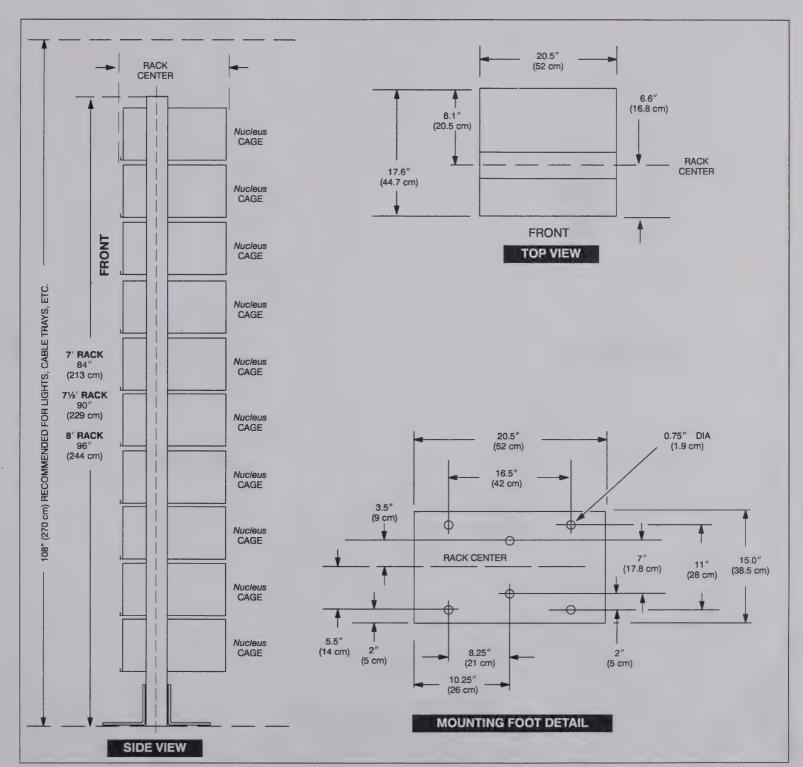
Dimensions and Clearances for 7', 71/2', and 8' Racks
